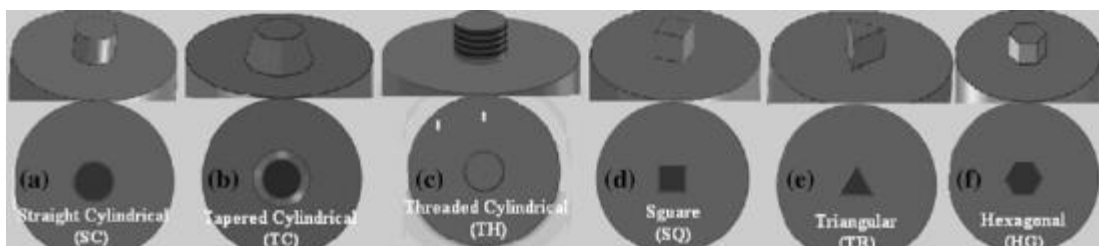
FSSW tool profiles (a) straight cylindrical, (b) tapered cylindrical, (c) threaded cylindrical, (d) square, (e) triangular and (f) hexagonal (Bilici et al., 2012)
